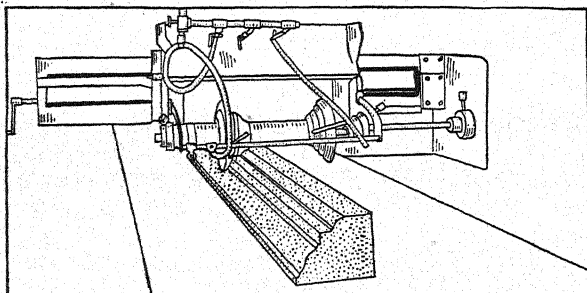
Stone-moulding machine cutting moulding with Carborundum wheel. (Courtesy of Lincoln Iron Works.)
